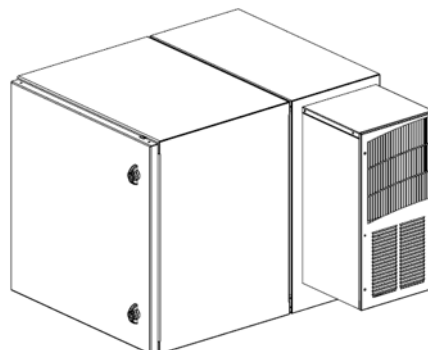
12 RU UDF shown with a T20 AC unit. Remove the gland plate and mount the air conditioner aligned to the holes provided in the enclosure. The gland plate is not required once the air conditioner is installed on the enclosure.
